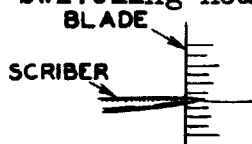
ADJUSTING SCRIBER TO DESIRED DIMENSION
